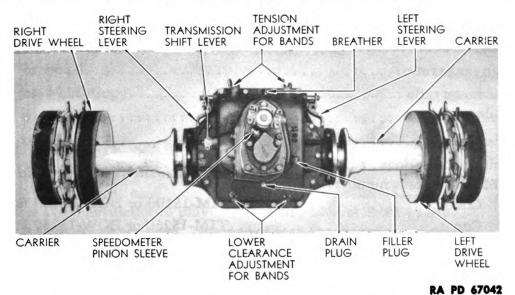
Controlled Differential and Transmission Assembly with Final Drive Assemblies
